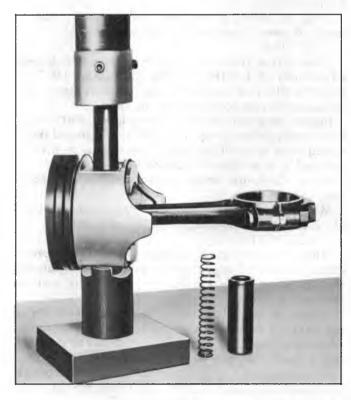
Removing Piston Pin (In-Line and "Small V8")
